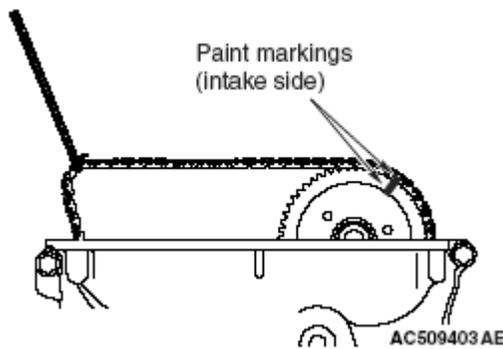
Identifying Paint Mark Of Intake Side Camshaft Sprocket And Timing Chain
